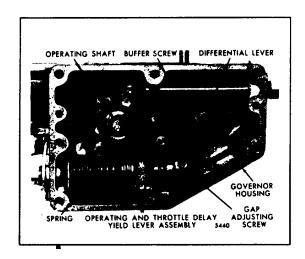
Throttle Delay Yield Lever (6V Engine)
